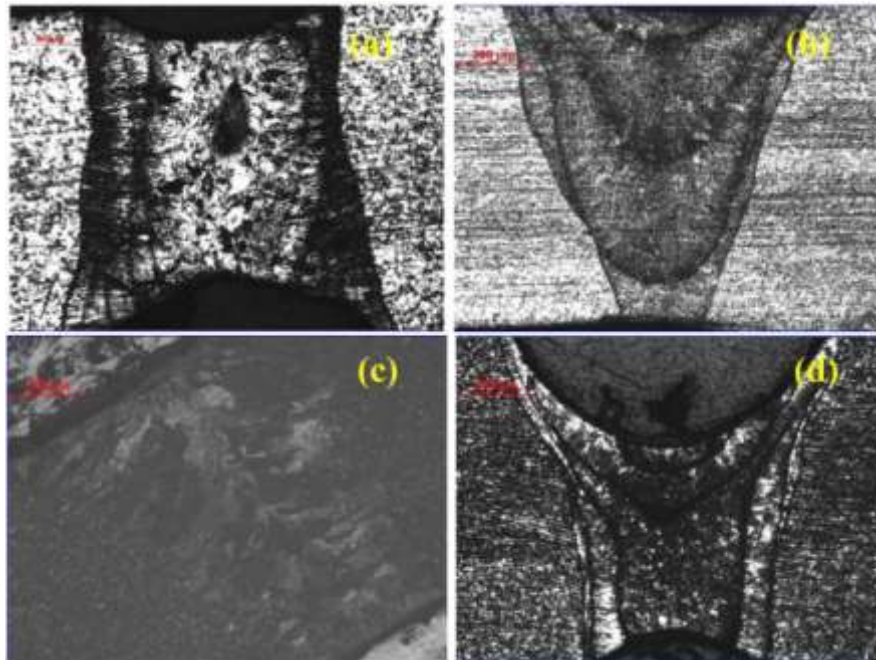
Macrographs show the fusion zone profiles of samples (a) R9, (b) R10, (c) S4 and (d) S5 [11].
